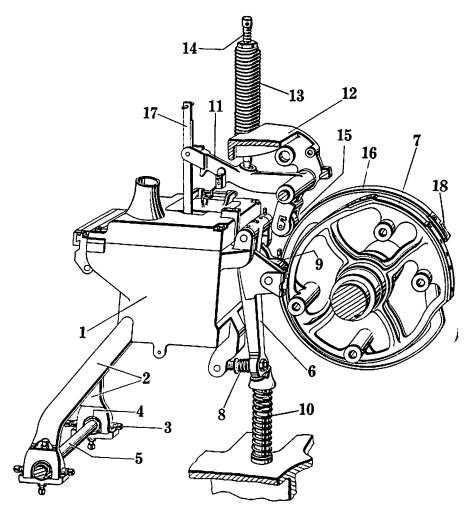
Perspective View of the Metal Pot, the Pot Pump Mechanism and Related Parts in Assembly
